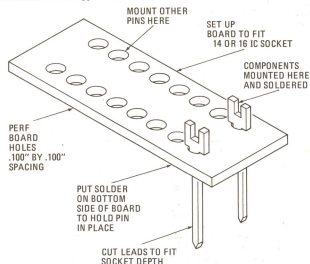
VECTOR T-44 PINS AND PERFORATED BOARD can be used as a plug-in terminal strip for discrete components.
